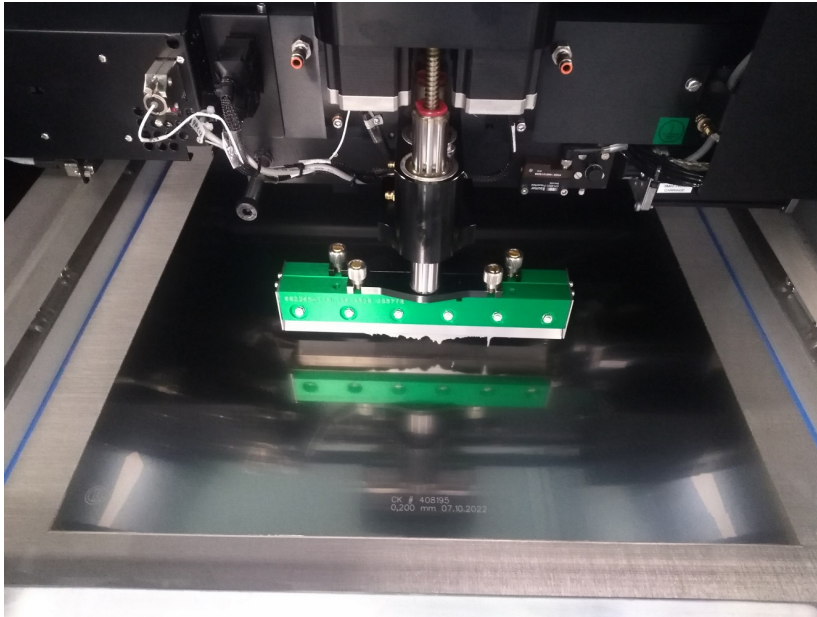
DEK stencil-printing machine at CEA-Leti.
